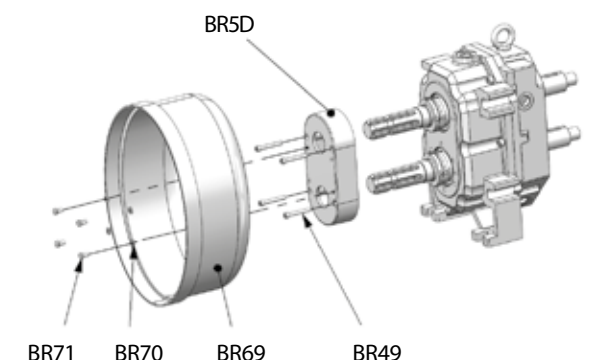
Disassembly of the gearcase step 1 version D.
